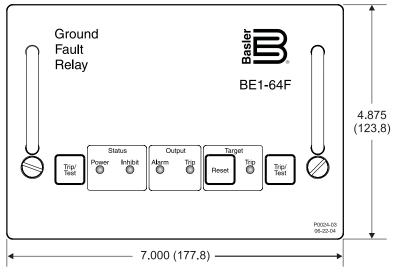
BE1-64F Dimensions in Inches (Millimeters)
